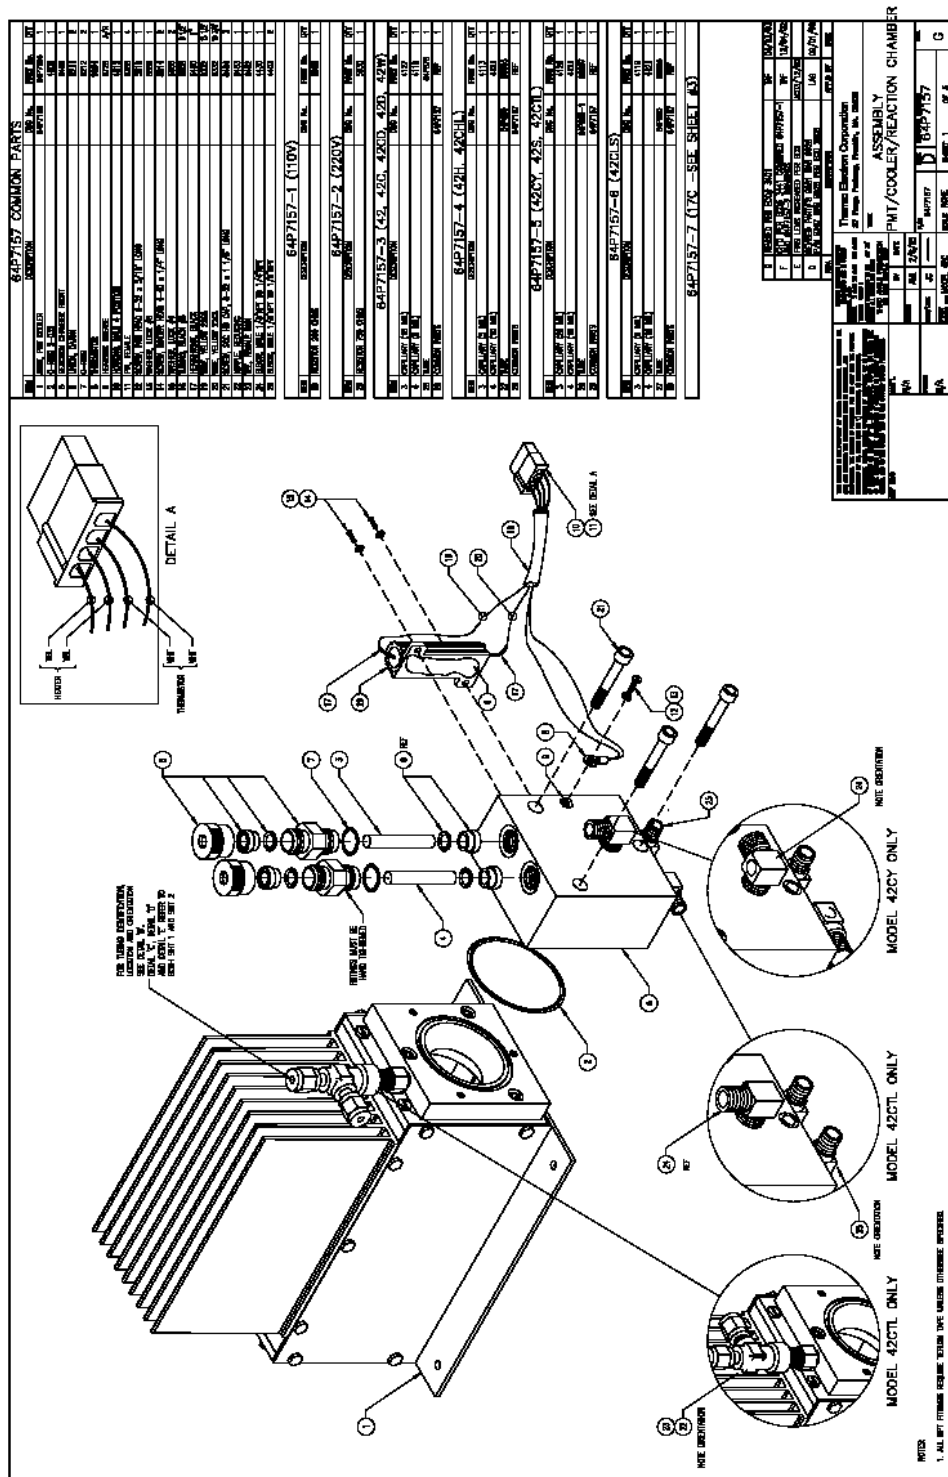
PMT Cooler and Reaction Chamber (exploded view)
